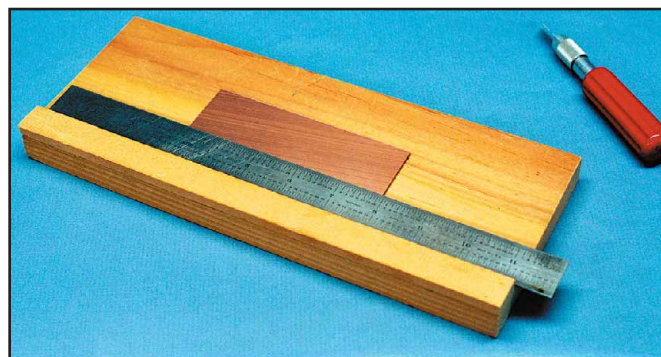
Ready to score a 7/8 inch wide printed circuit strip. Here a metal scale gauges the width; the simple cutting jig assures accurate, uniform dimensions piece to piece.
